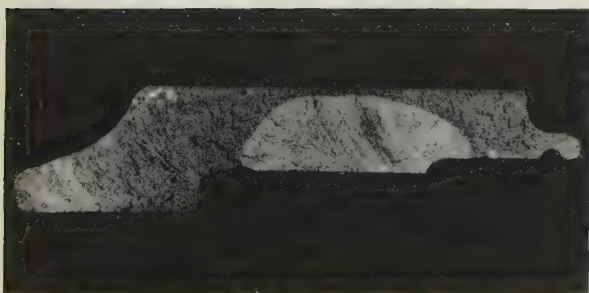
FIG. F.—"Flash-Line" Defect in Aluminium Alloy Forging. (Thorley.)
